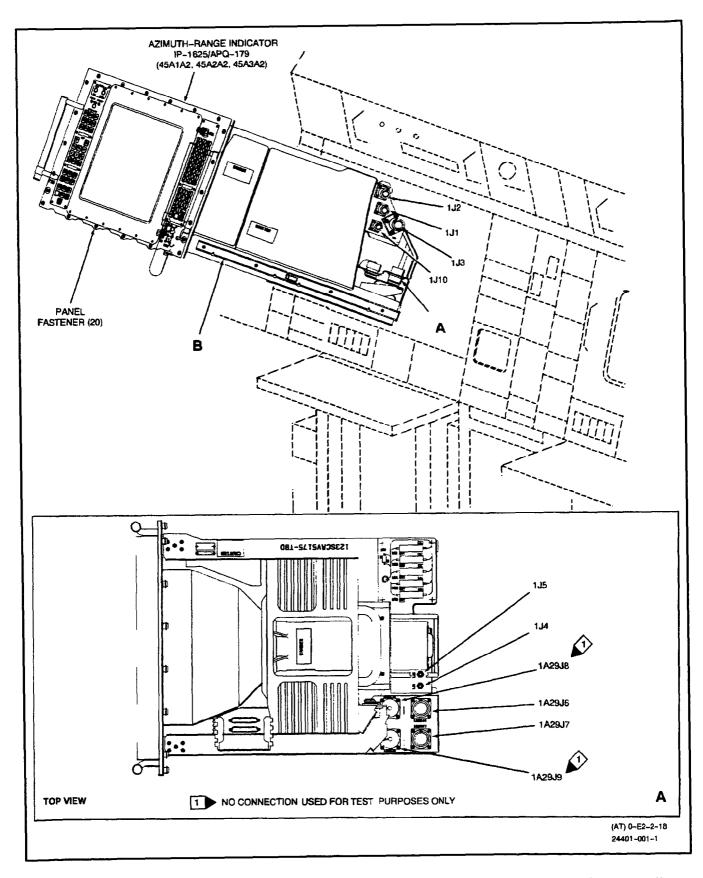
Removal and Installation of Azimuth-Range Indicator IP-1625/APQ-179 (Sheet 1 of 2)
